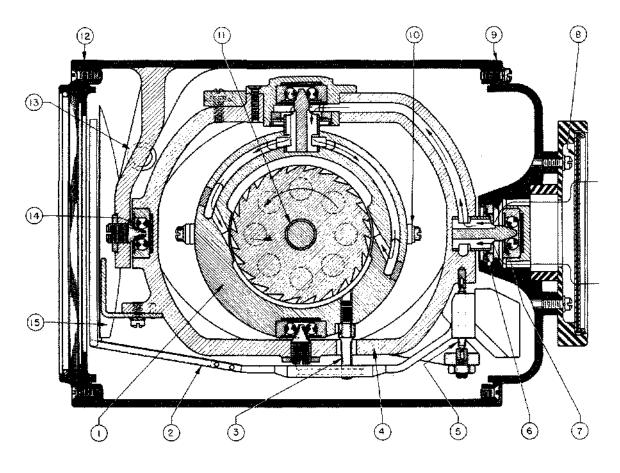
PLAN VIEW OF THE GYRO-HORIZON
